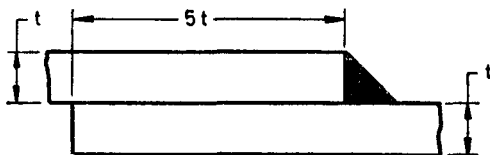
SINGLE FULL-FILLET LAP JOINT
